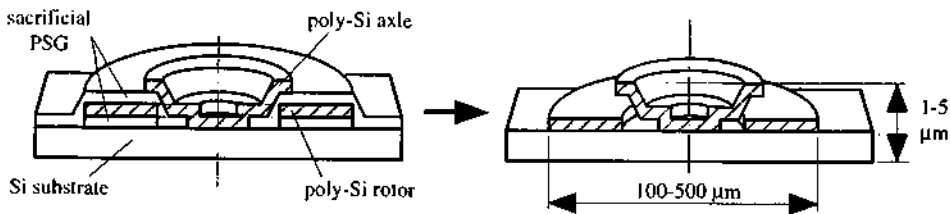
Cross-sectional perspective view of a surface micromachined polysilicon rotary disc, before (left) and after (right) the sacrificial PSG layer etching.
